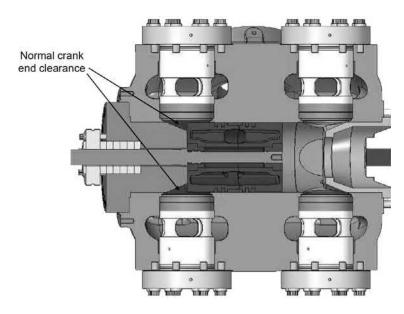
Sectional view illustrating the normal crank-end clearance.
